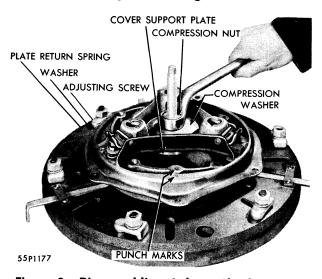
Disassembling Auburn Clutch in Fixture C-585
